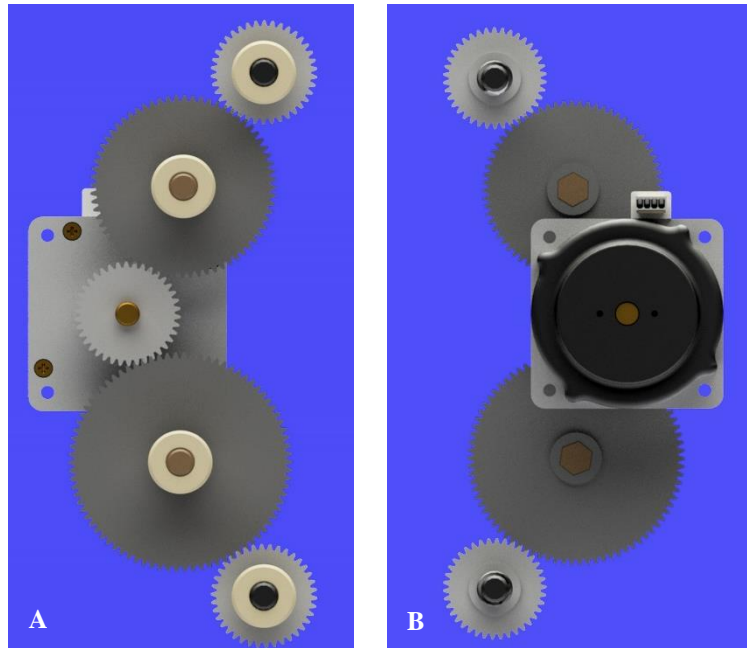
X-stage's Gear system with X-motor (A) Front side (B) Back side
